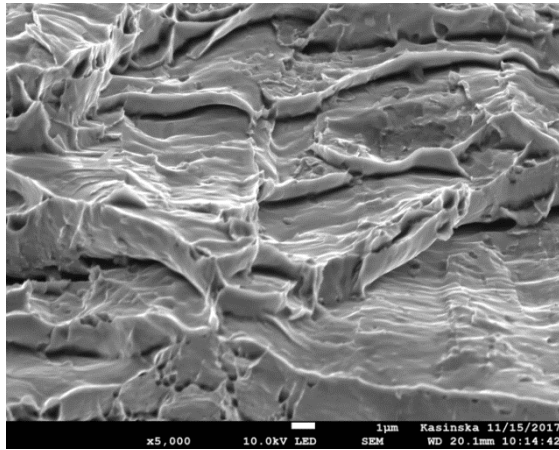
Ductile fracture due to the dislocations glides along the slip planes; specimen PR; material HW, temp. -20°C
